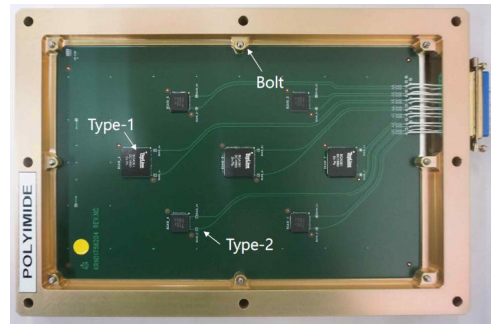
PCB sample configuration with type 1 and type 2 chips installed to the aluminum frame by bolts, and the chips locations
